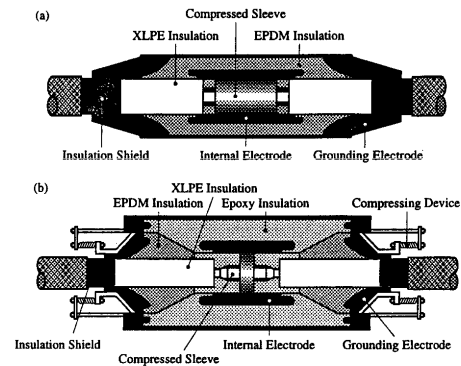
Type of joints: (a) Premolded-type and (b) Prefabricated-type
